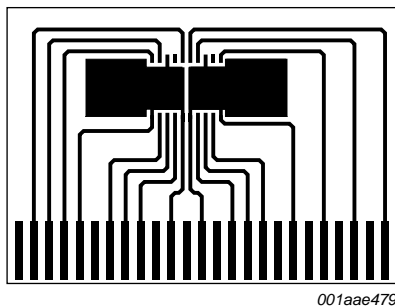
PCB used for thermal tests; heat sink area 200 mm²
